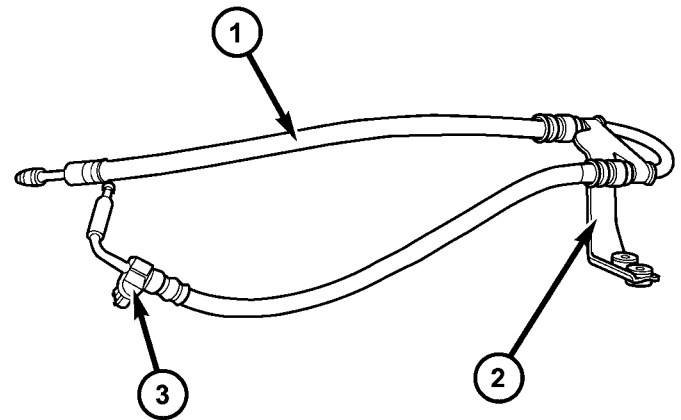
HIGH PRESSURE HOSE ASSEMBLY
